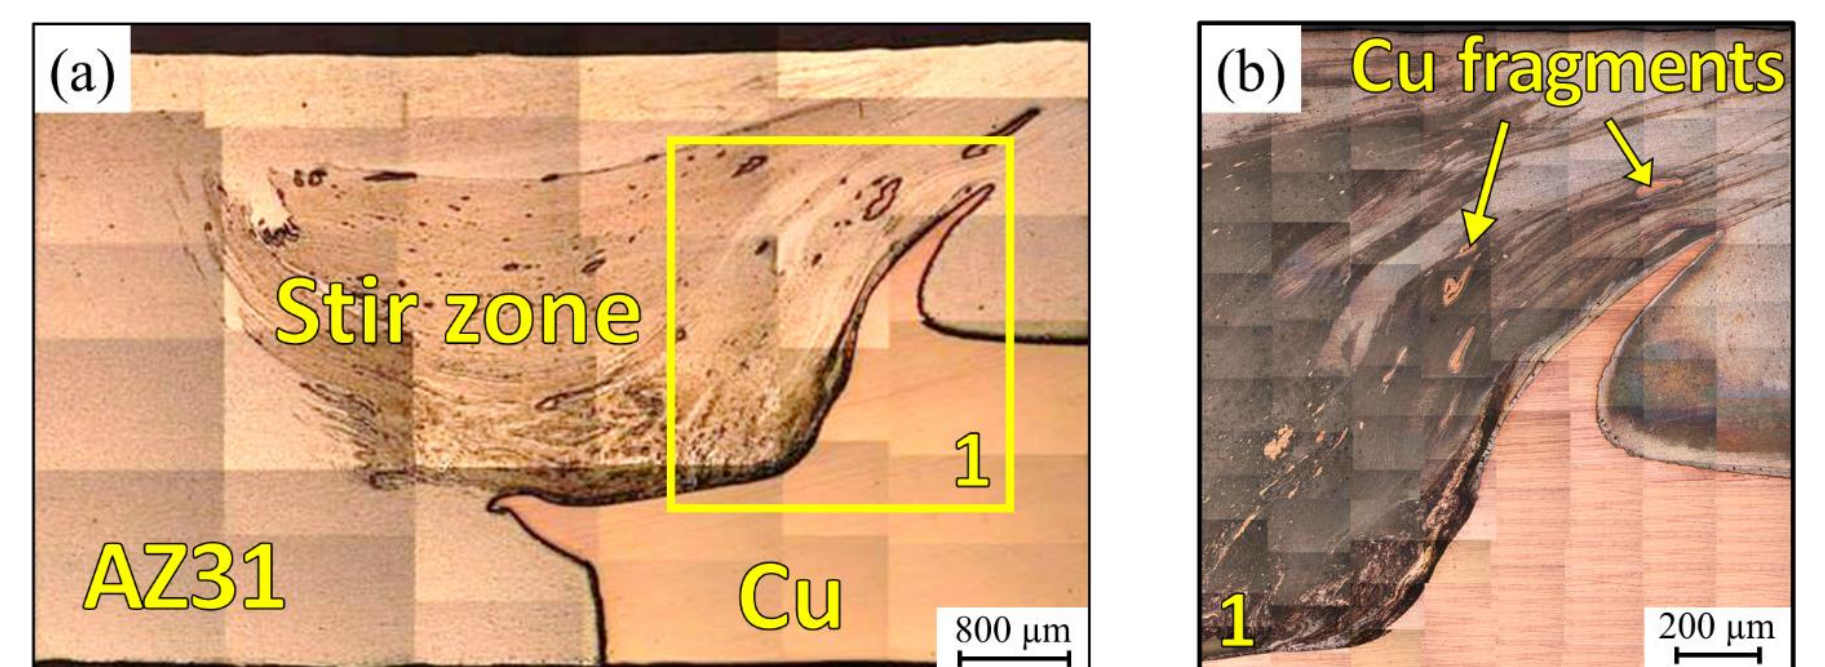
(a) OM image of the weld zone. (b) Higher magnification of the interface.
